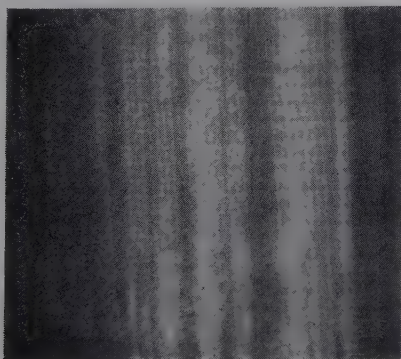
Radiograph of rolled sheet steel containing slag inclusions.
